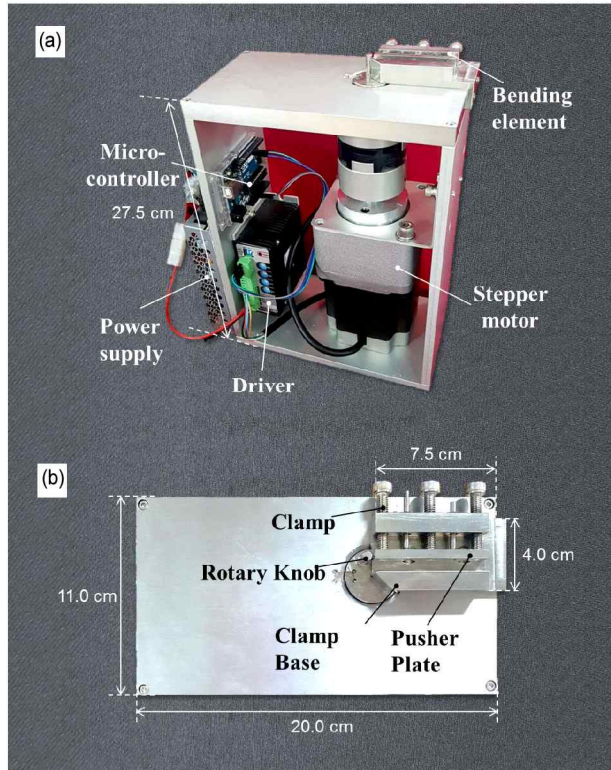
The proposed motorized bending apparatus: (a) Overall appearance; (b) top view of the components of the bending element.
